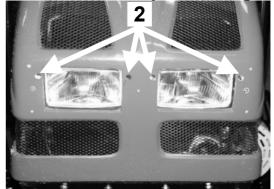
Placement of light adjustment screws. 1-dummy; 2- adjustment screws openings.
